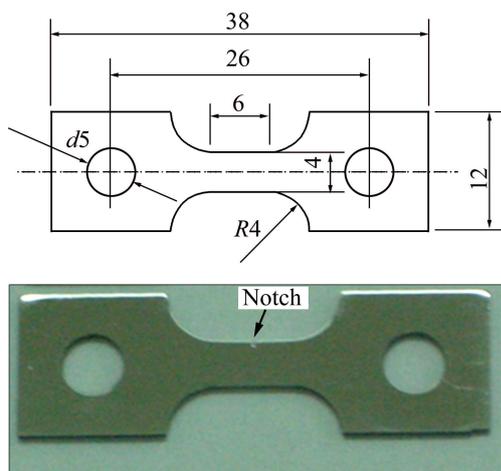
Dimensions and macroscopic view of in situ tensile test specimen (Unit: mm)
